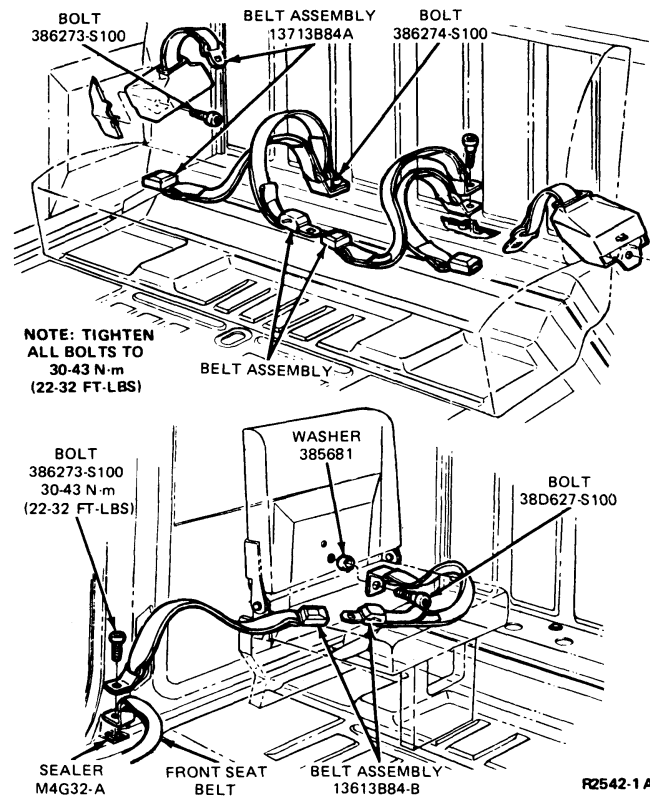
Rear Seat Belt Installation—F-Series Super Cab
